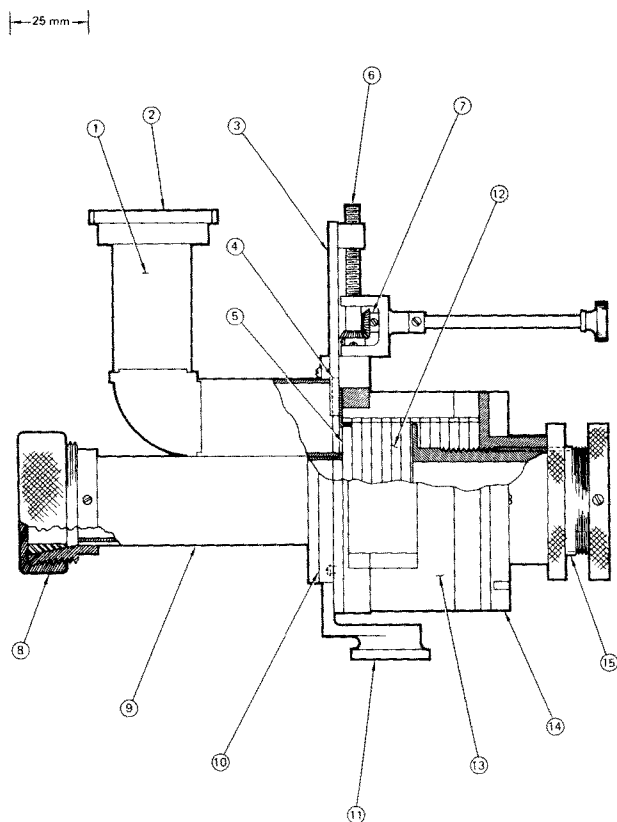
TE_{011} cylindrical EPR cavity for gas-phase experiments: (1)—X-band waveguide; (2)—UG-39/U waveguide flange; (3)—nylon shutter; (4)—Lucalox disk; (5)—coupling hole; (6)—threaded shaft; (7)—miter gear; (8)—collet to clamp sample tube; (9)—bushing to prevent microwave leakage; (10)—modulation coil holder; (11)—bracket for modulation coil connector; (12)—copper rings; (13)—molded epoxy; (14)—coil holder; (15)—threaded plunger.
